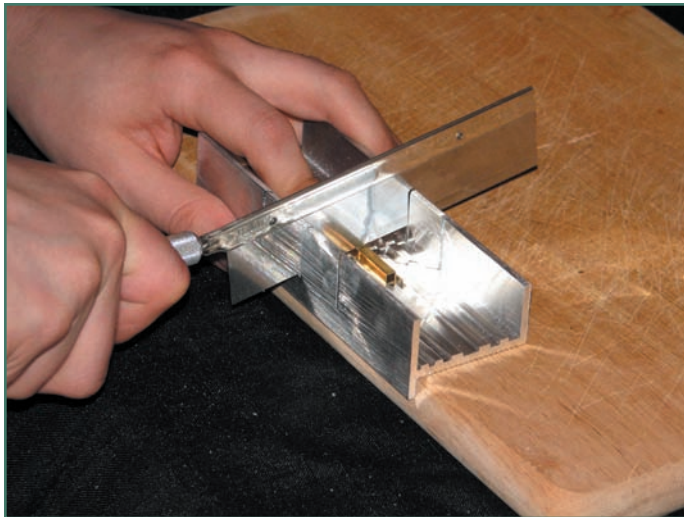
Cut pieces of K&S tubing for the head and hands to slide into.
